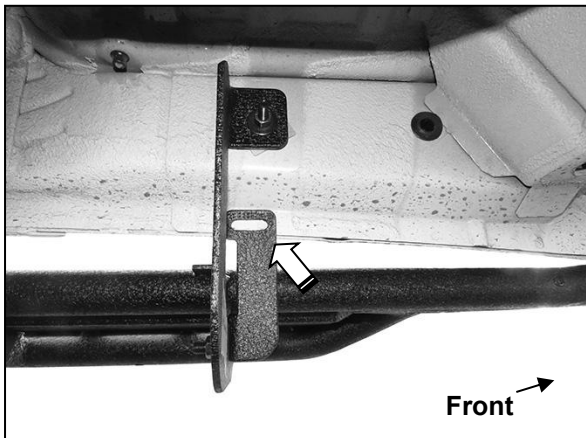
136" wheelbase models, attach driver/left Running Board assembly to the #3 and rear Bolt Plates
